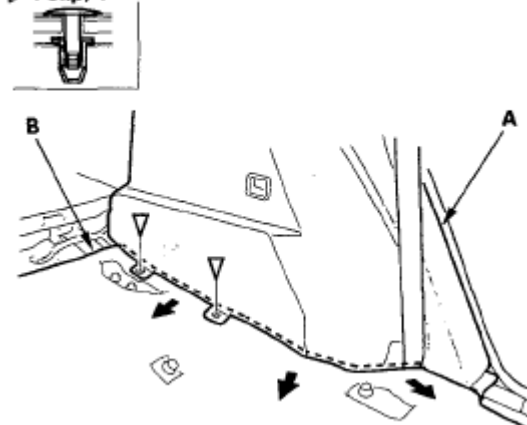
Identifying Rear Side Trim Panels And Edge Of Carpet
